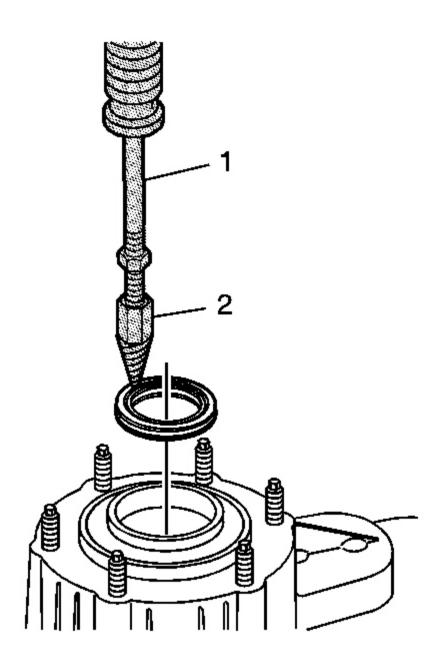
Using J 36825 To Remove Input Shaft Seal From Transfer Case Courtesy of GENERAL MOTORS CORP.
